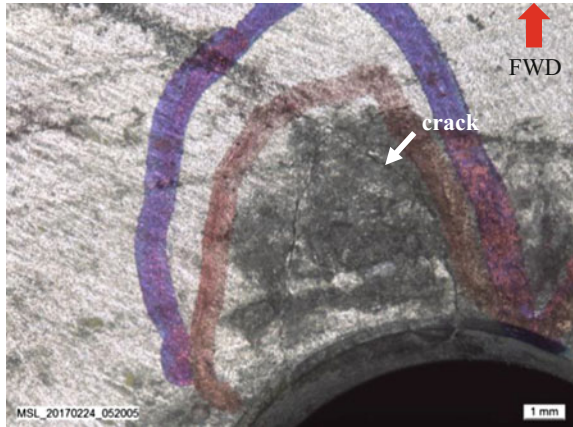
Fracture surface of crack on bolt hole #24
